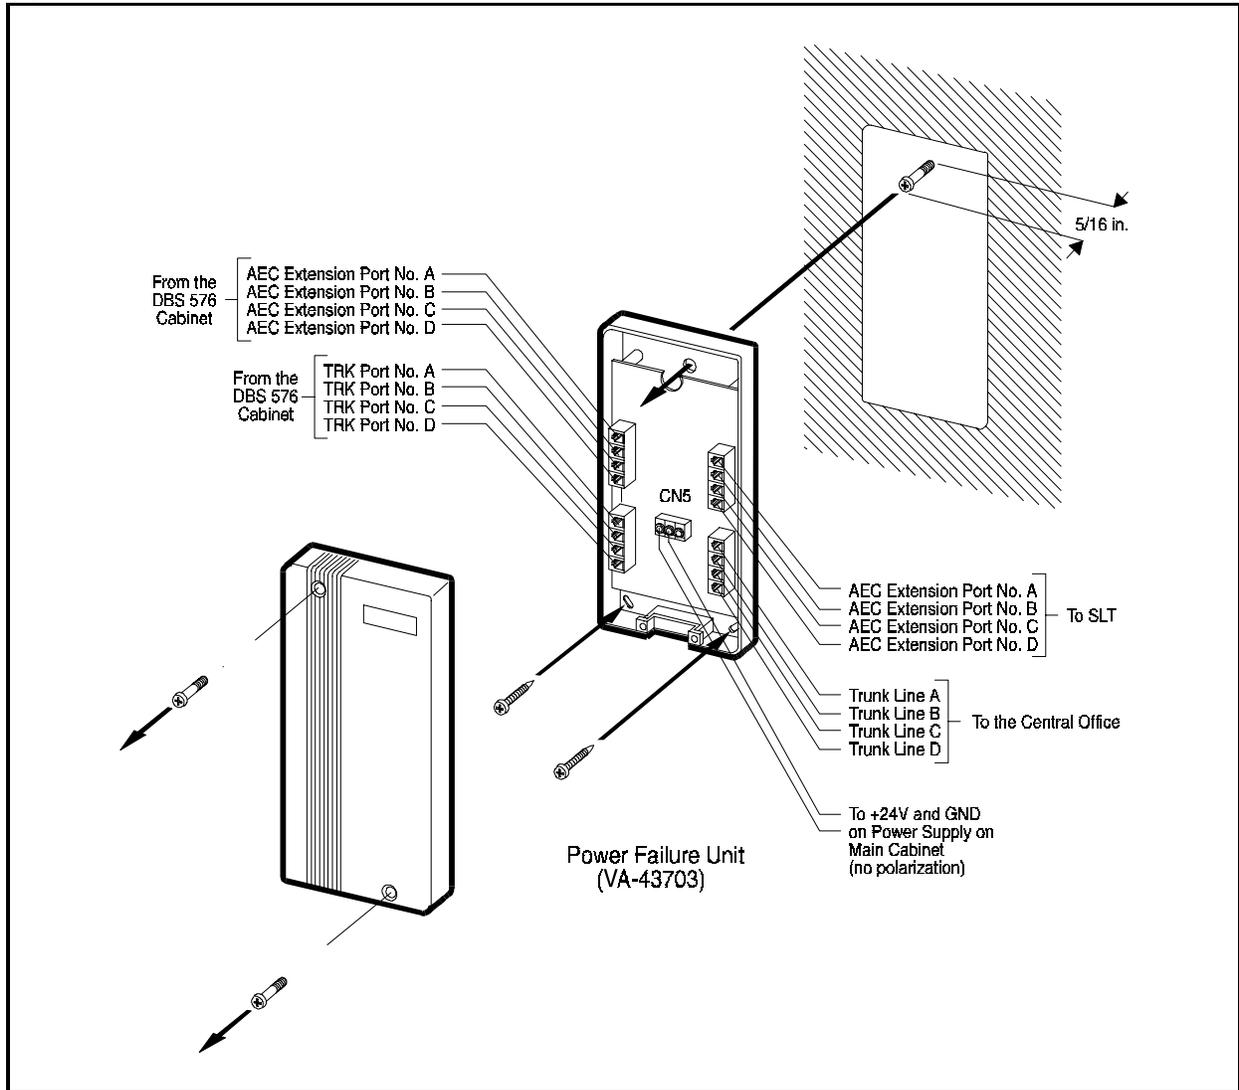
Power Failure Unit cable punch-out plate and wall mounting
